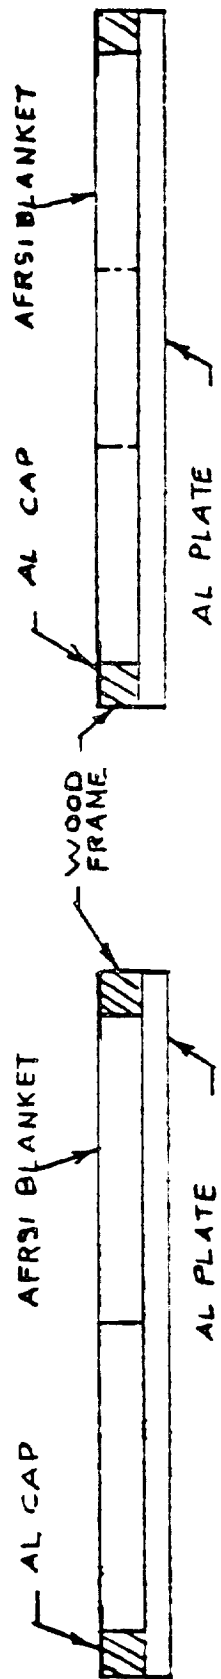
b MODEL 96-O FIXTURE HOLDING PANEL
